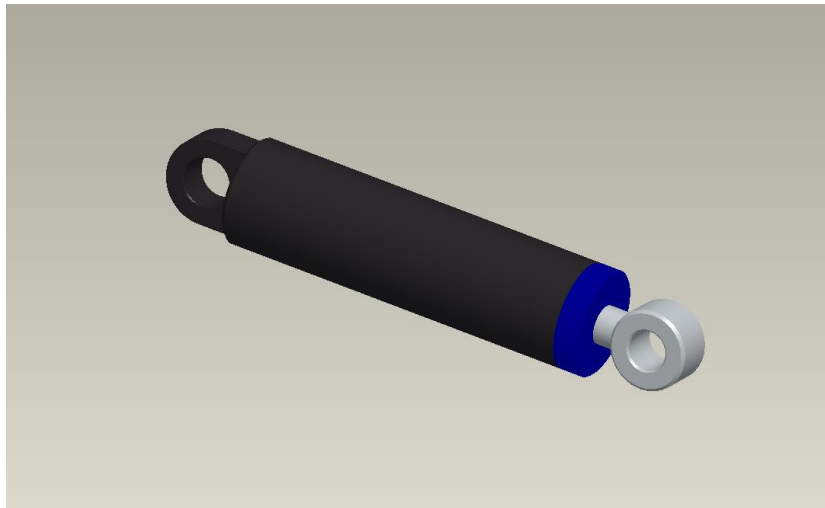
Simple three dimensional model of the hydraulic cylinder unit designed.
